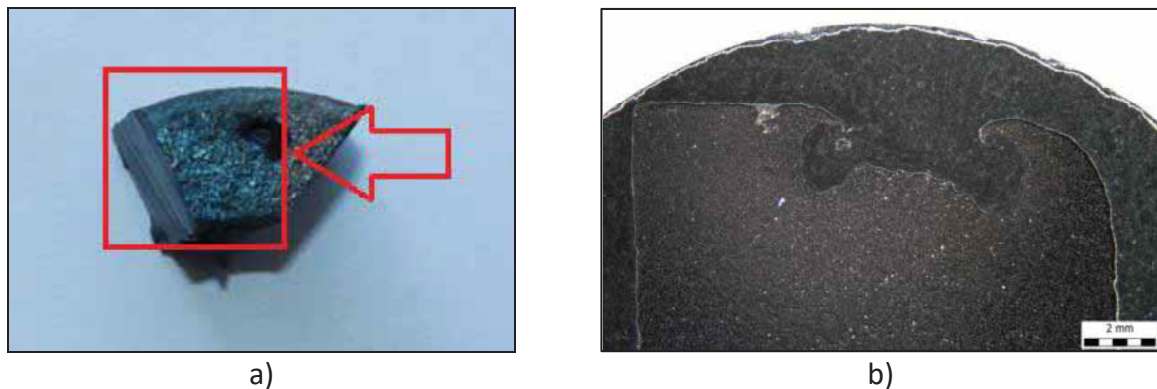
Overview of casting section with surface defect: a) photograph of sample, b) sample prepared for metallographic analysis
